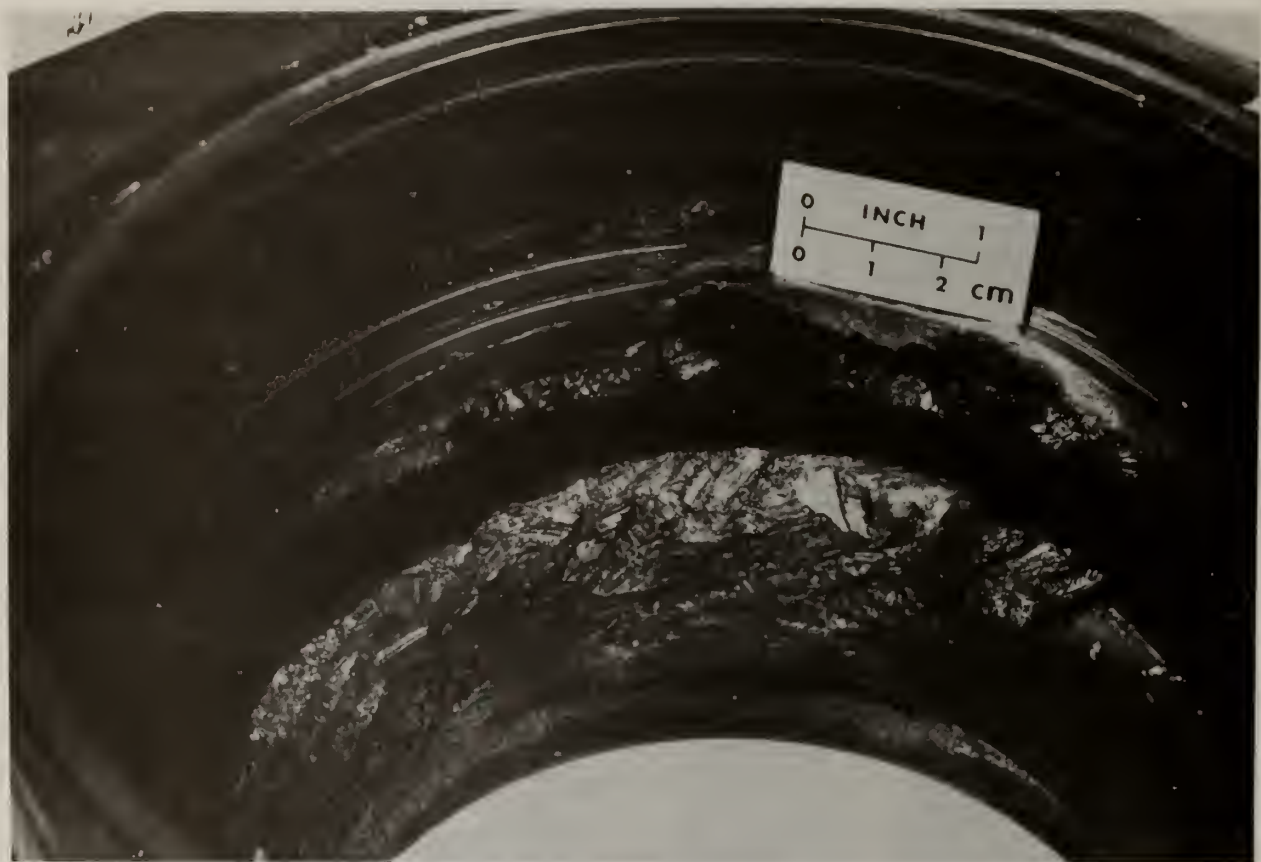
Turbocharger Housing Damage After Containment of Wheel Burst
